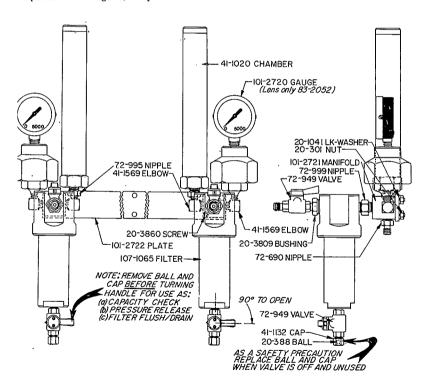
HOT HYDRAULIC FLUTD MANTFOLD ASSEMBLY
